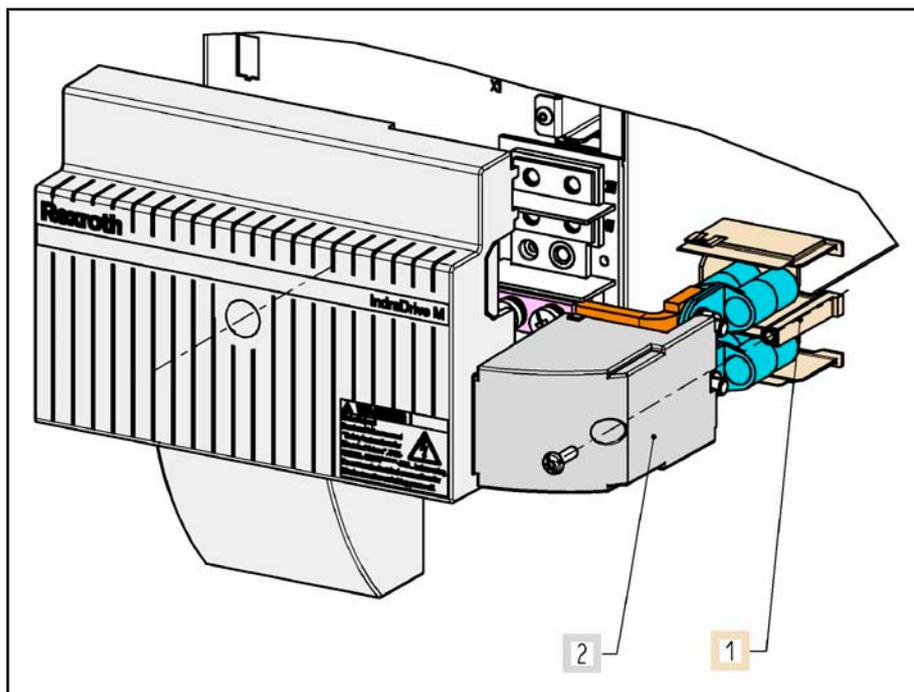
HAS05.1-004-NNR; mounting the touch guard
